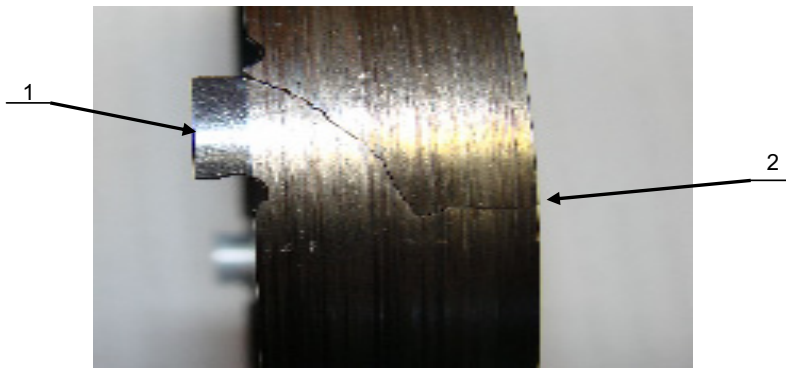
The cracked sleeve fastening the internal bearing race to the engine frame: 1 – the component protecting the sleeve against rotation, 2 – the point of sleeve crack
